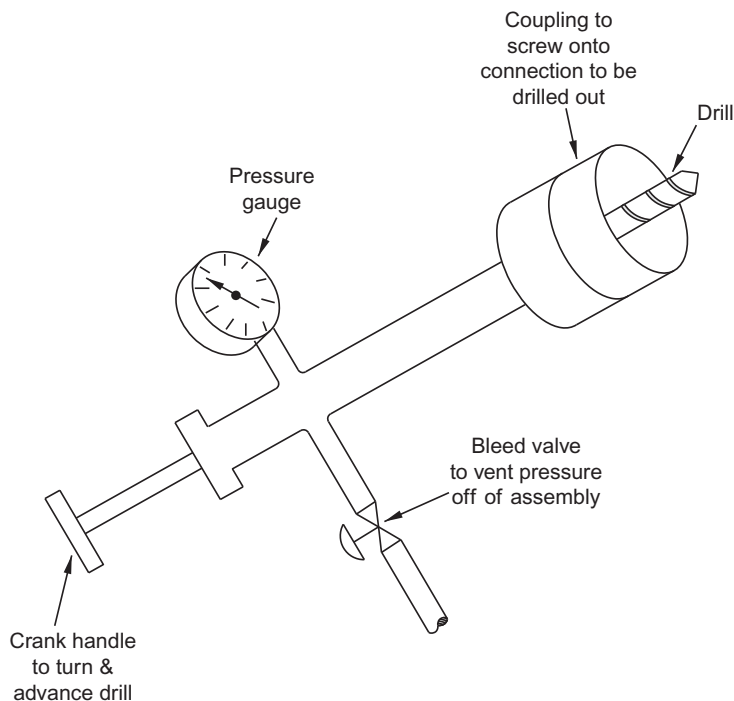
Safe bleeder unplugging device (i.e., rod-out tool).
